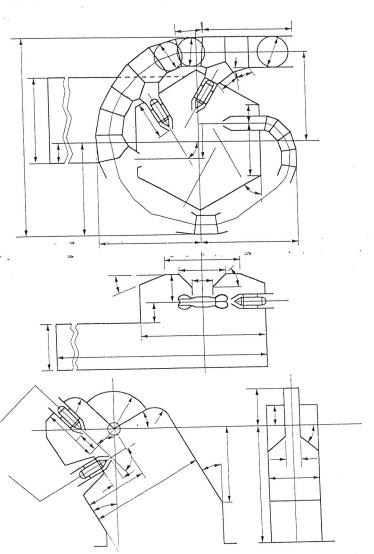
Pelton turbine: Example of dimensions to be checked on the distributor and the housing of vertical and horizontal shaft machines
